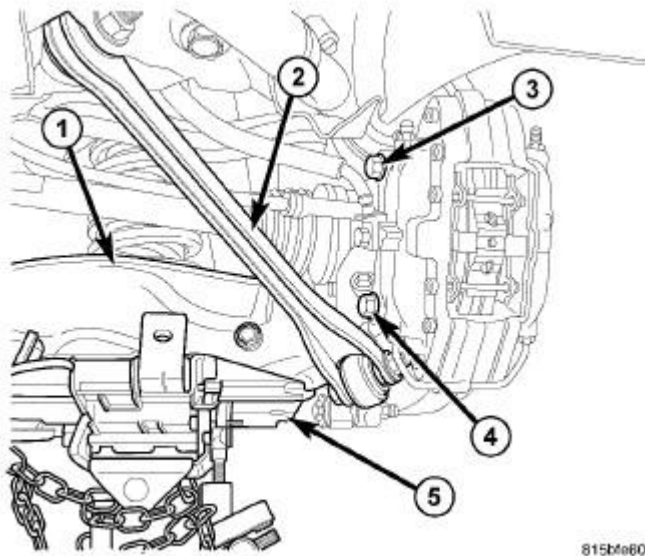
ACCESSING REAR CALIPER MOUNTING BOLTS
